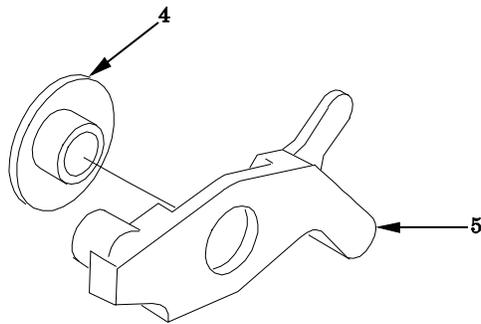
Assembly of Action Lock and Action Lock Bushing.
